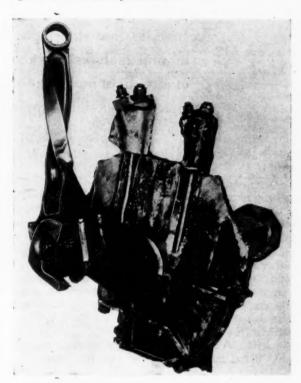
Showing location of fracture and twisting of connecting rod on Liberty 12 engine
